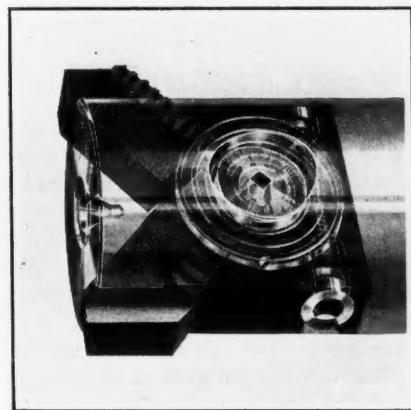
Phantom View, showing Construction of the Angle-type Cutter
